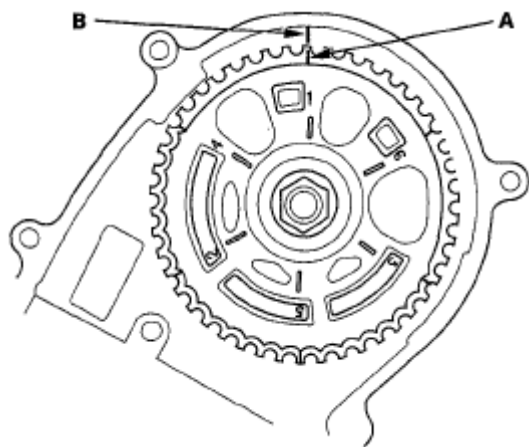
Aligning TDC Marks On Camshaft Pulleys - Front
